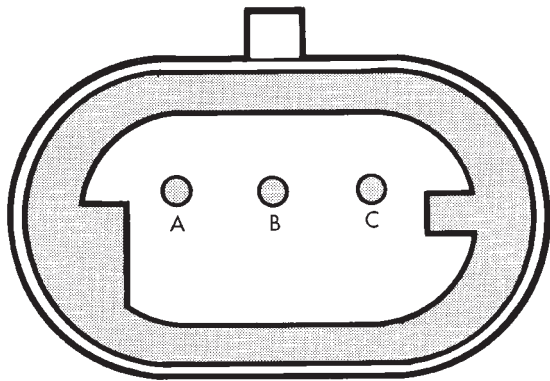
Crankshaft Position Sensor—5.2L Engine—Typical
